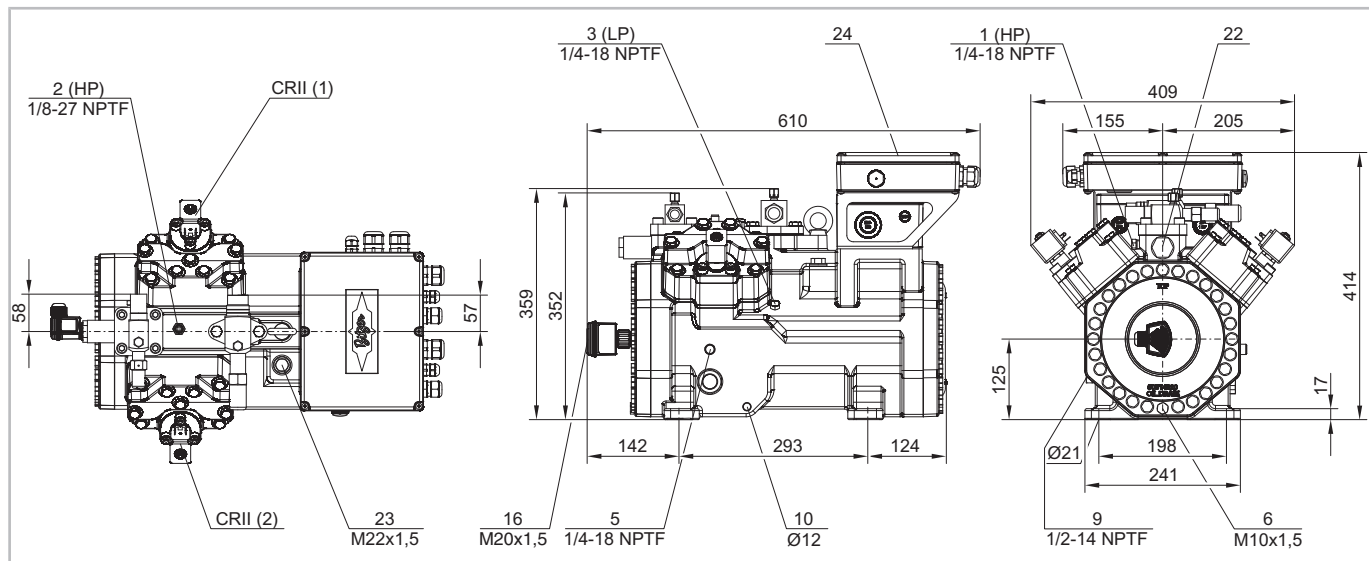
Dimensional drawing 4PTEU-6LK .. 4KTEU-10LK
